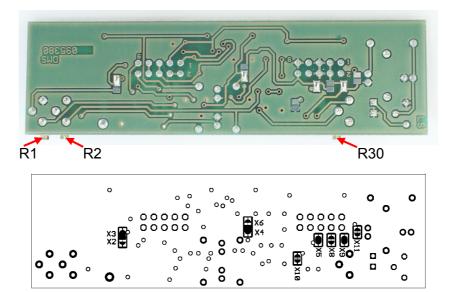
E-801.15 SMD version, solder side, with corresponding drawing showing the solder bridges that replace the jumpers and provide additional settings
